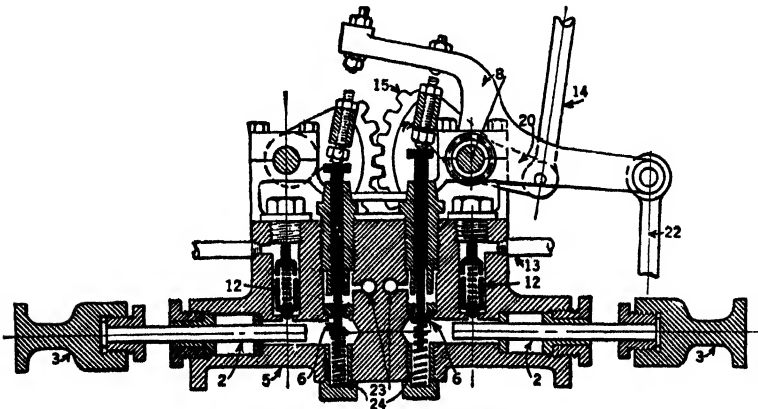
Cross section of Busch-Sulzer fuel pump.
